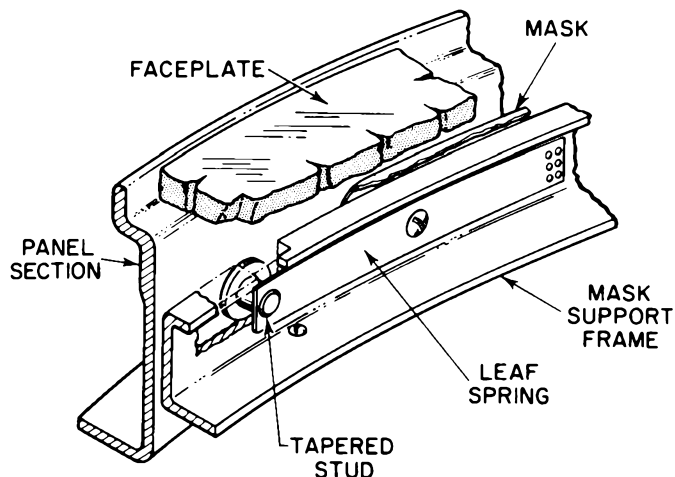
Details of Spring Mounting of the Shadow-Mask Support Frame (as used in the 21AXP22A)
